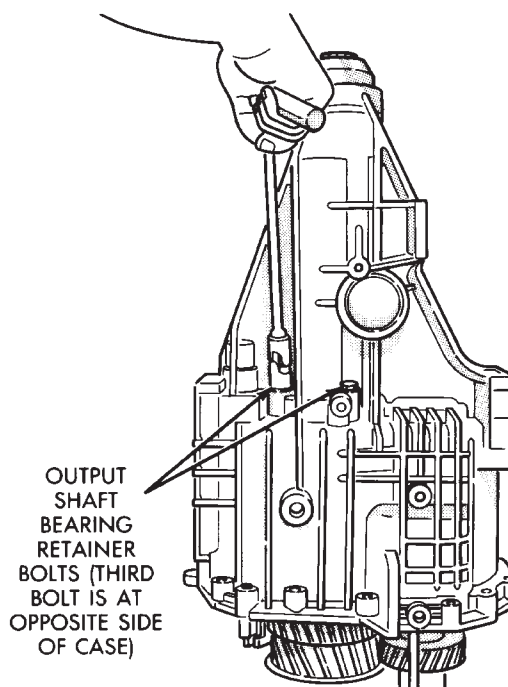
Removing/Installing Output Shaft Bearing Retainer Bolts—2WD
